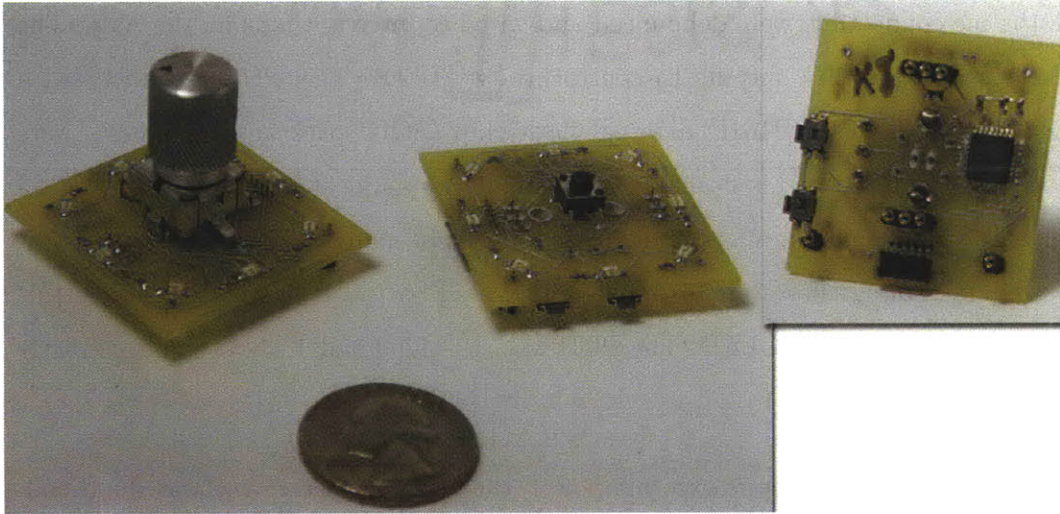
Photographs of populated connectible PCBs. The left hand photograph shows the tops of the button and knob connectibles, the right hand photographs shows the bottom of a knob or button connectible.
